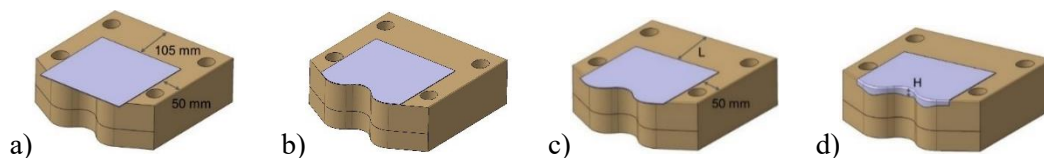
(a) Position of the rectangular blank on the cutting tool, (b) after cutting, (c) positioning the cutting specimen on the bending tool, (d) finished specimen (after flanging).
